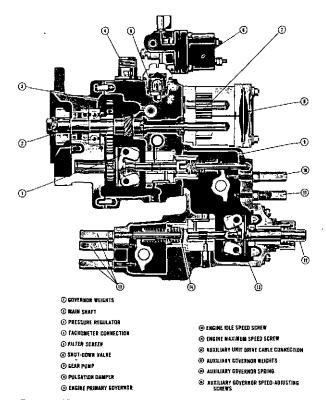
, (FWC-8). PT (type R) fuel pump with torque converter governor
